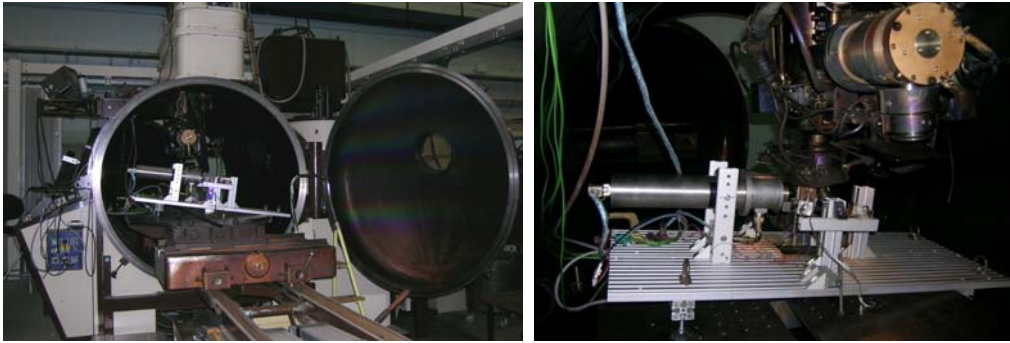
experimental set up used for the JWRI tests; vacuum chamber on the left and electron canon together with welding table on the right [22].
